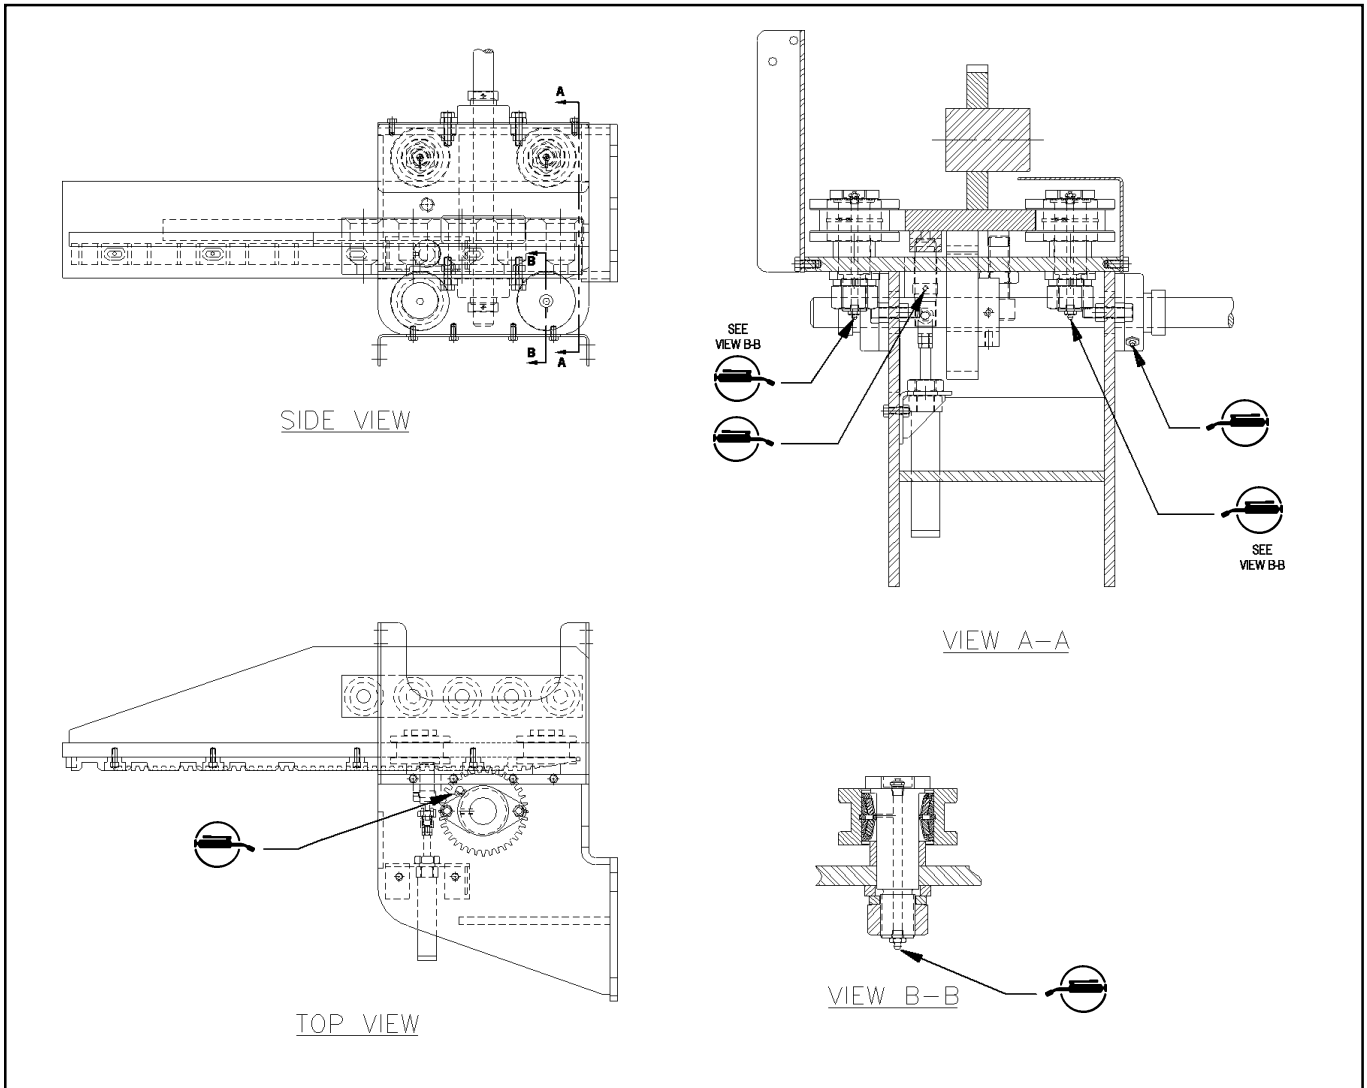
Lower Rod Rack - 7 Grease Points
